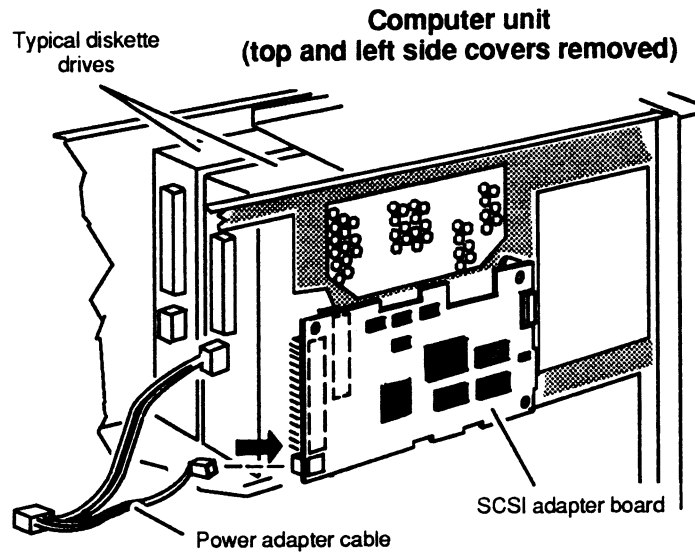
Plugging the Power Adapter Cable into the SCSI Adapter Board
